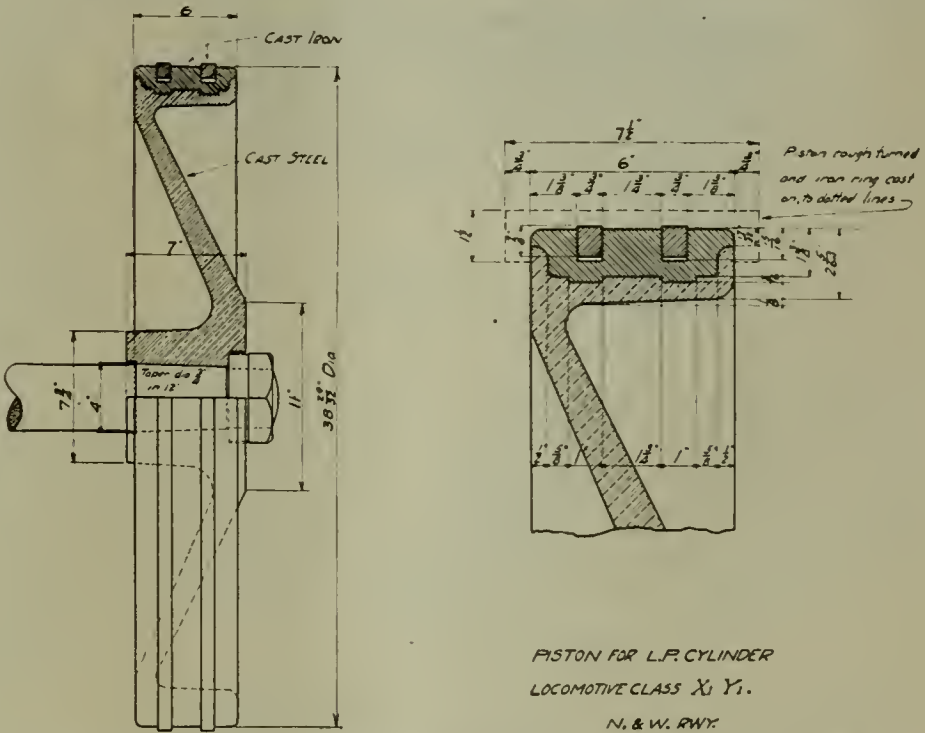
Type of Piston with Groove Machined in Face, Into Which Molten Iron Is Poured.
